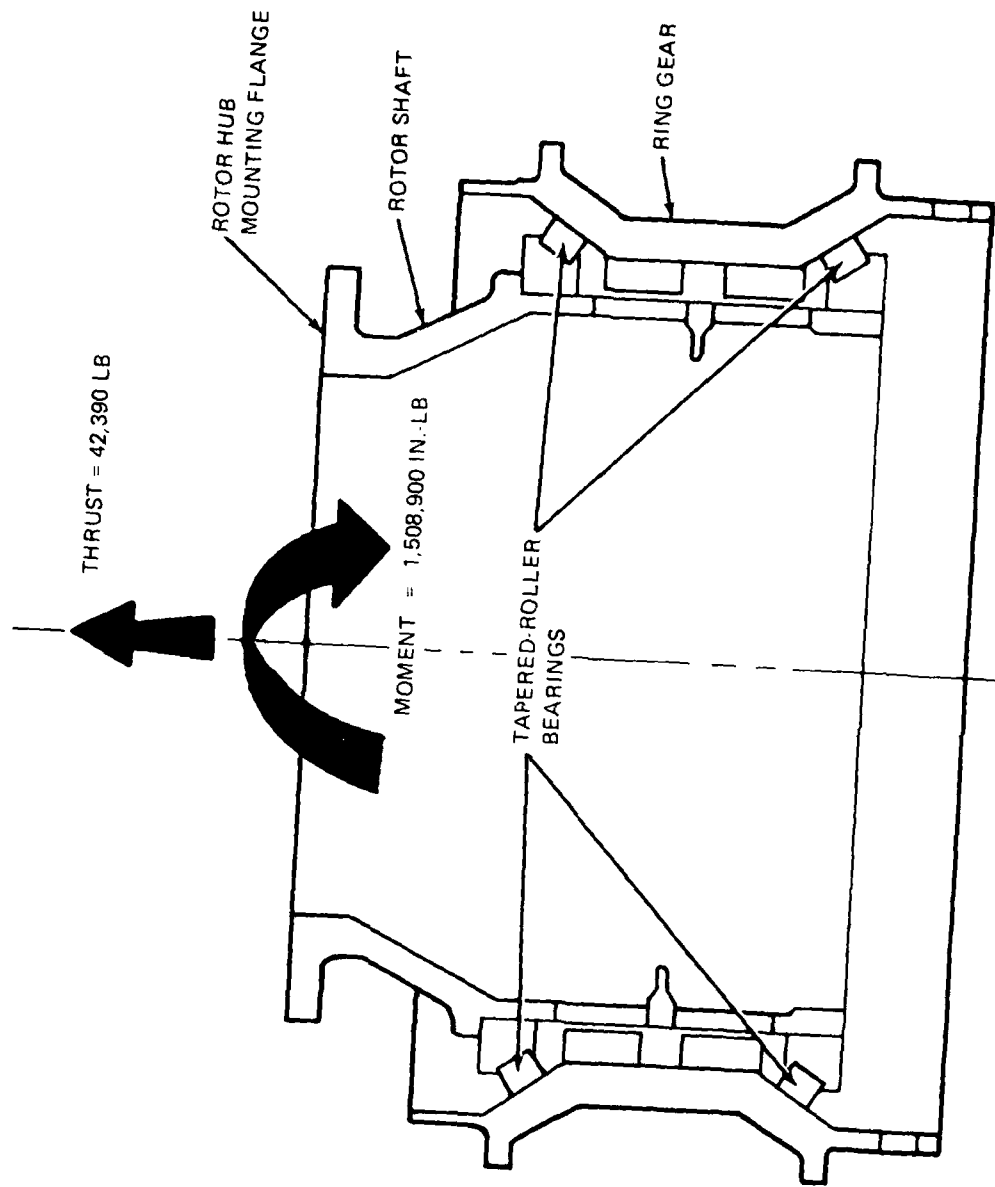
Cross-Sectional View of Ring Gear and Rotor Shaft Bearing Support Showing Equivalent Ultimate Loads Used in the Finite-Element Analysis.
